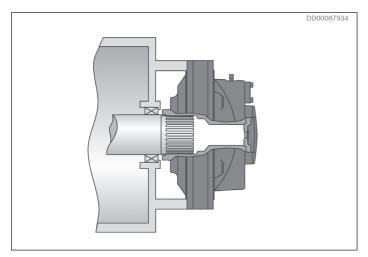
Flange mounted motor with splines and low radial load from driven shaft.
